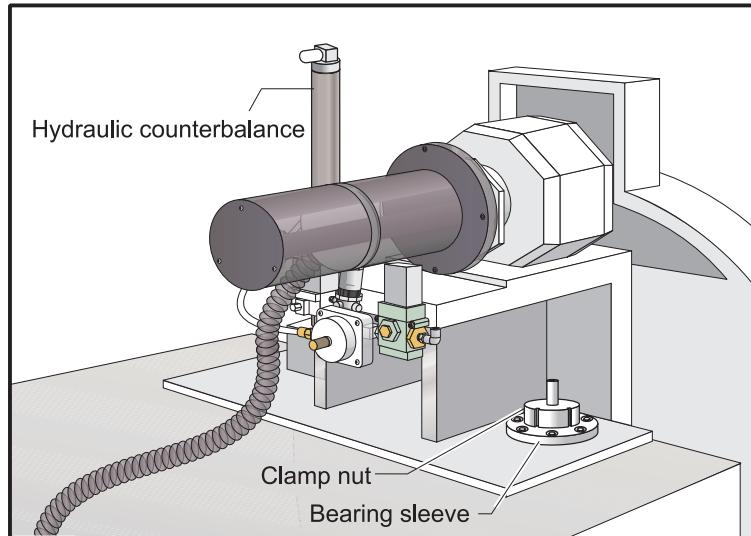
Y-axis lead screw motor end clamp nut and bearing sleeve.
